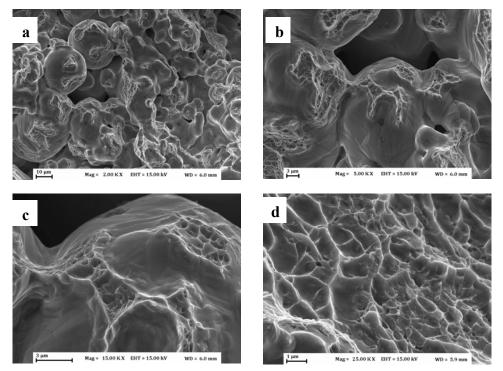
Fracture surface of Distaloy DH material sintered at N_2 -5H₂-0.5CO-(0.1-0.4)CH₄+ sinterhardening process.
